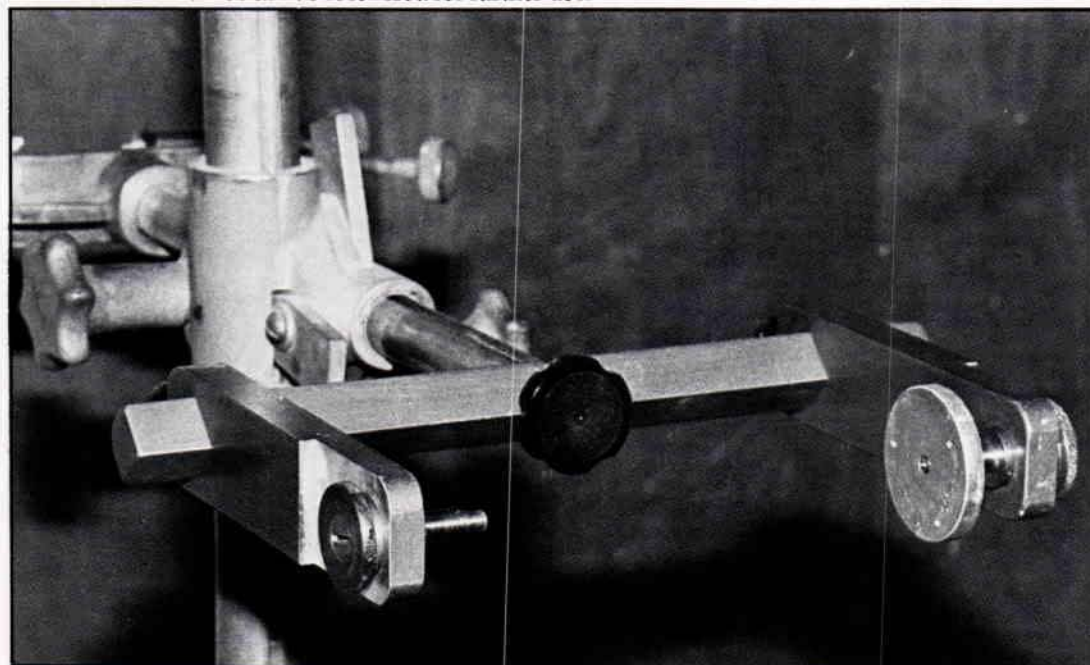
Brass mounting fixtures mounted in the alignment jig with the appropriate adapters. These mounting fixtures are turned down to points on the ends towards the model. A threaded aluminum disc, as described in Figure 8, is mounted on the right-hand mounting fixture. The point of the fixture is discernible in the center of the disc.
